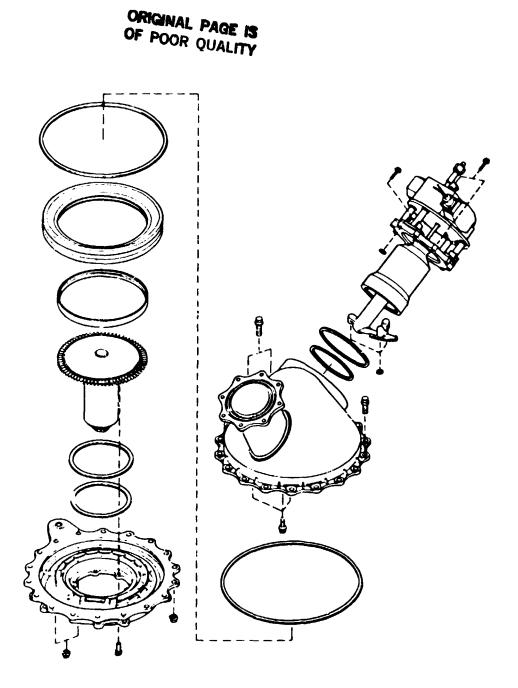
SRB APU turbine and GG assembly - exploded parts.
